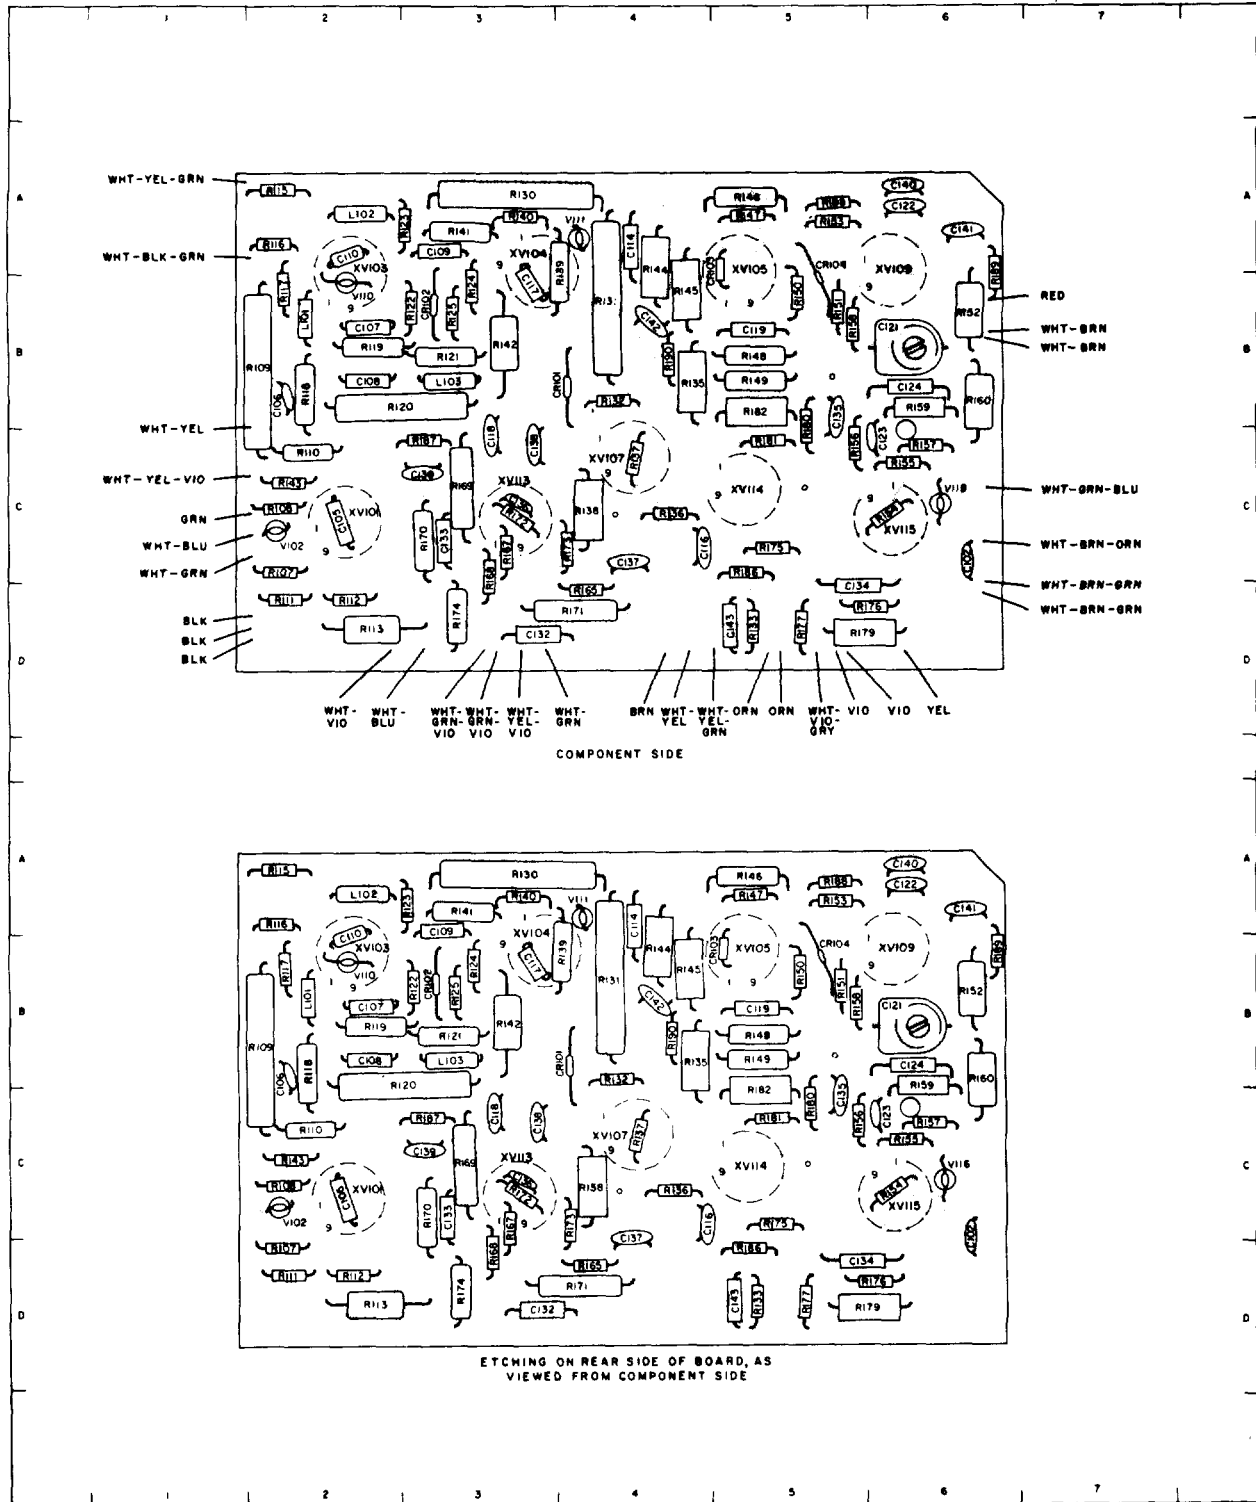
Sweep Generator Etched Circuit Assembly, Location of Parts
